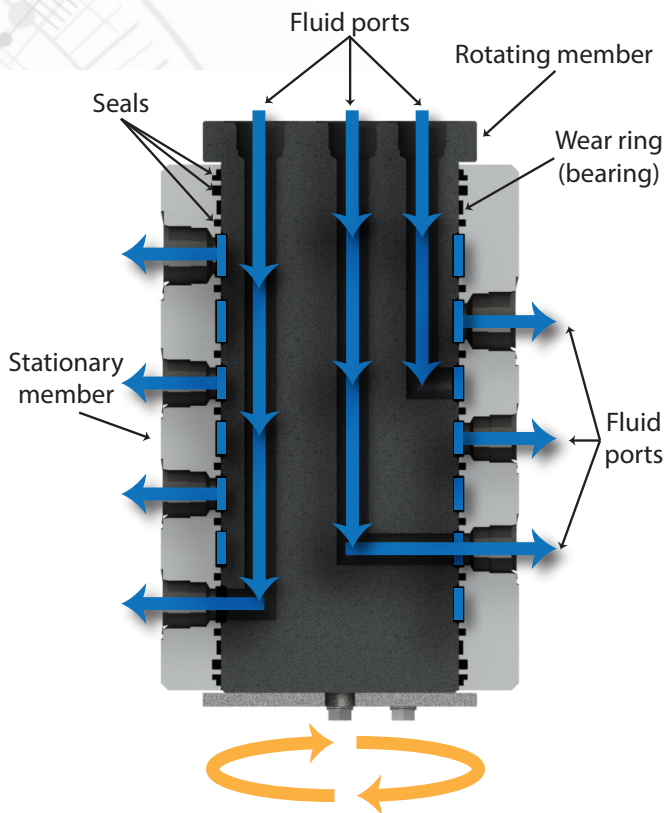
Cutaway view of the multi-port rotating manifold. Bearing construction allows the device to accommodate side loading.
